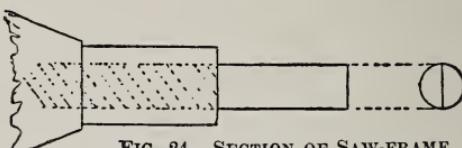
SECTION OF SAW-FRAME HANDLE.
